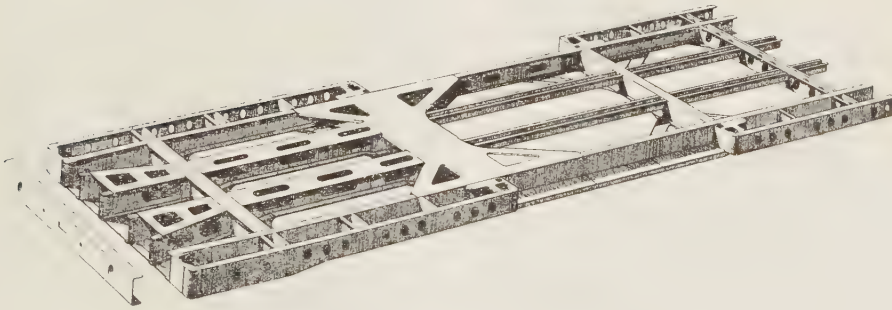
Perspective view of the frame ends (with the upper plates removed), showing the pressed steel box-shaped buffing and drawgear members.
